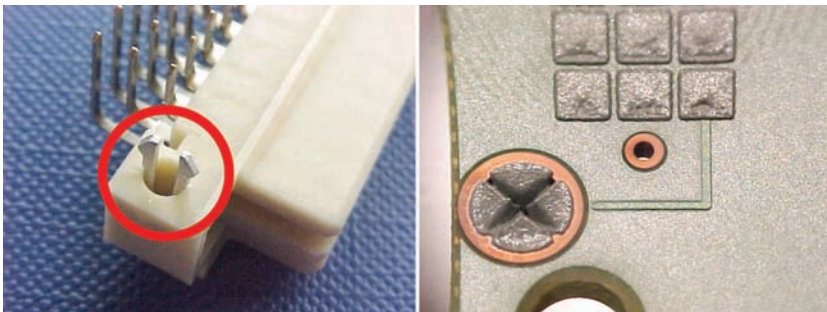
Connector hold-down barb (circled in red) and the corresponding location on the printed board after stencil printing solder paste. The solder paste deposit is split into four deposits in the through-hole and not on the surface of the pad so it is not squashed when the connector is inserted.
